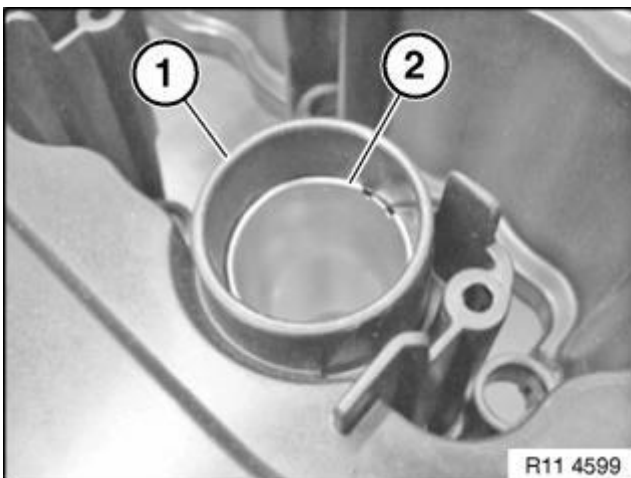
Slotted Sleeves (2) For Guiding Ignition Coils In Cylinder Head Cover (1) Must Be Replaced
